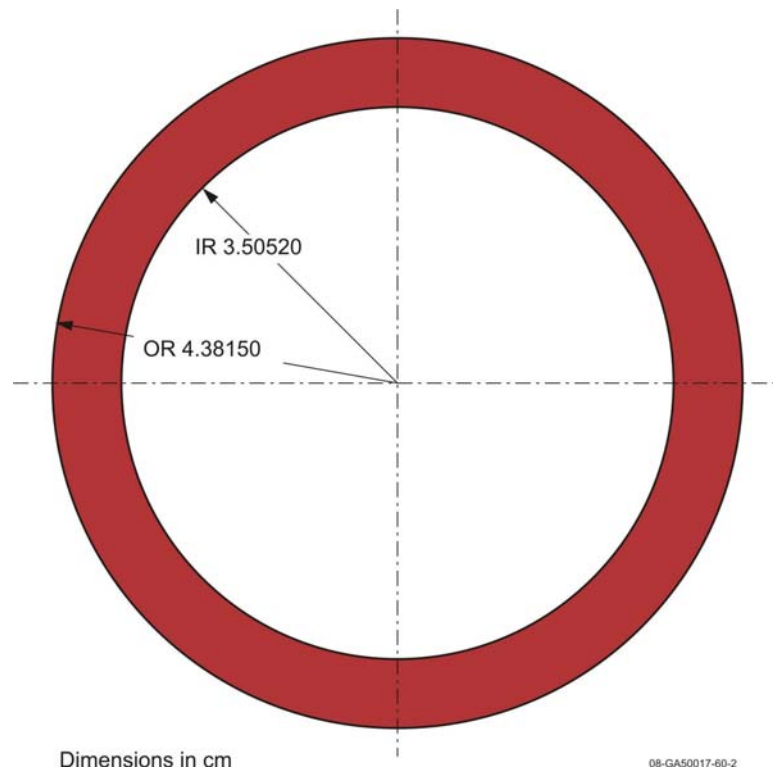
Horizontal Slice through the Top Portion of the Inner Subassembly Plate.
